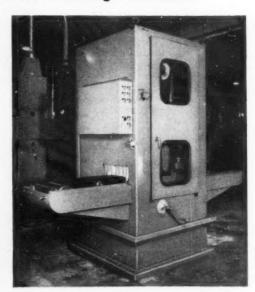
Churchill-Curtis Type 600C conveyor-type abrasive-belt grinding machine
